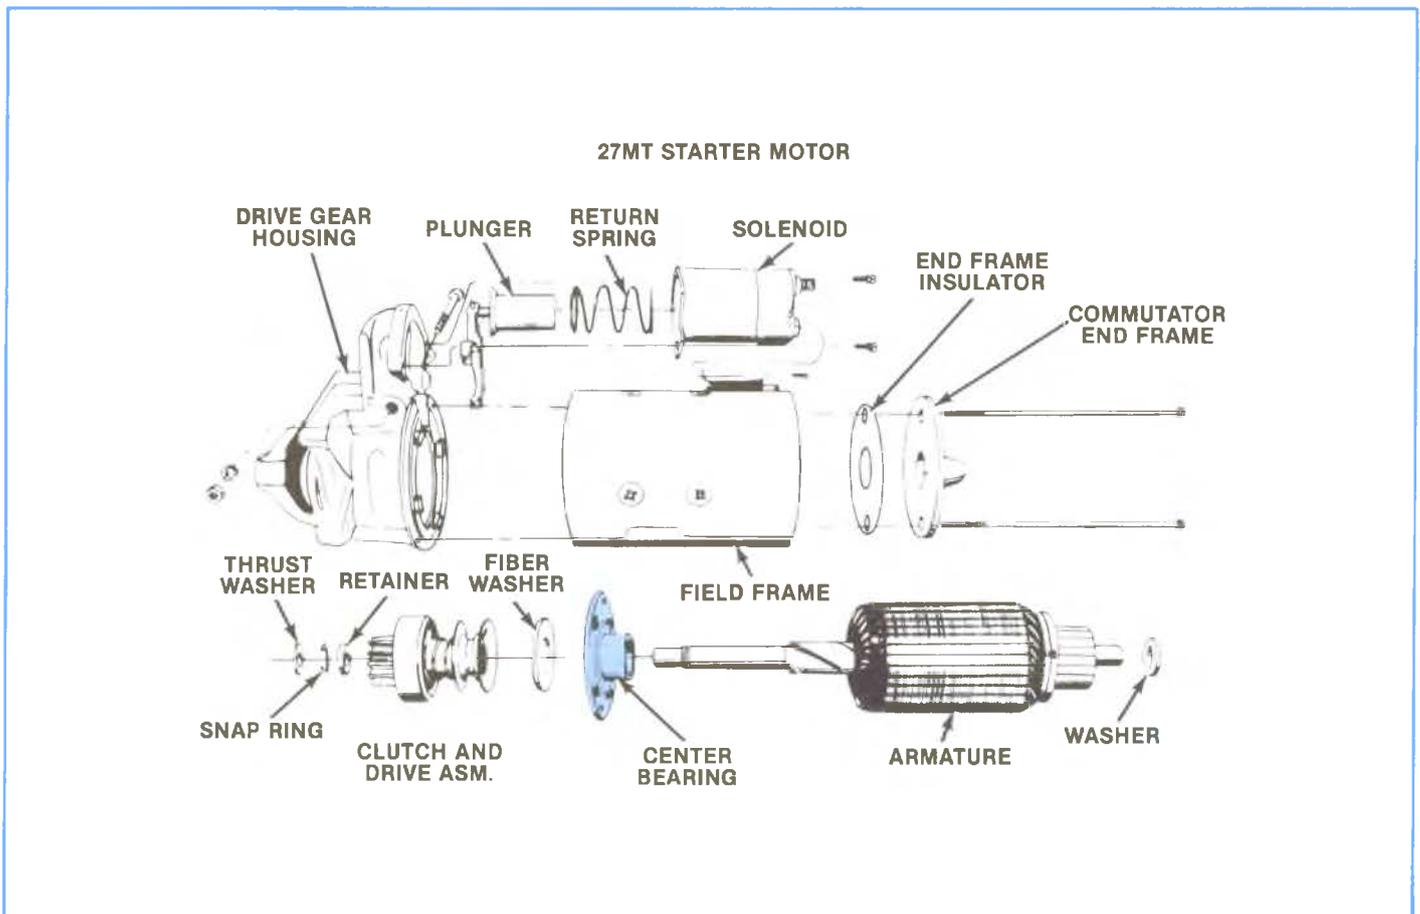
, 6.2L - 27MT Starting Motor Exploded View.
